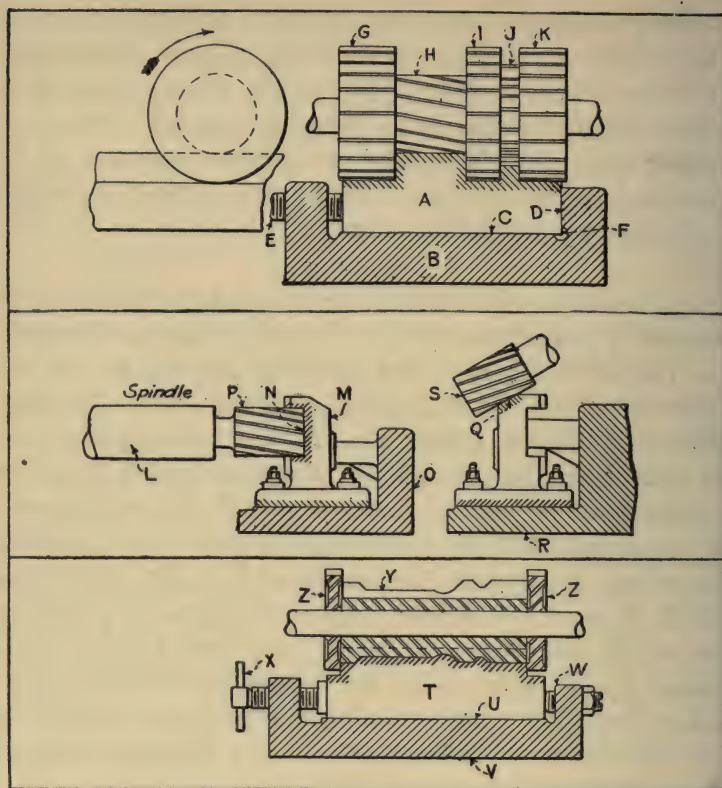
FIXTURES FOR VARIOUS KINDS OF MILLING OPERATIONS
